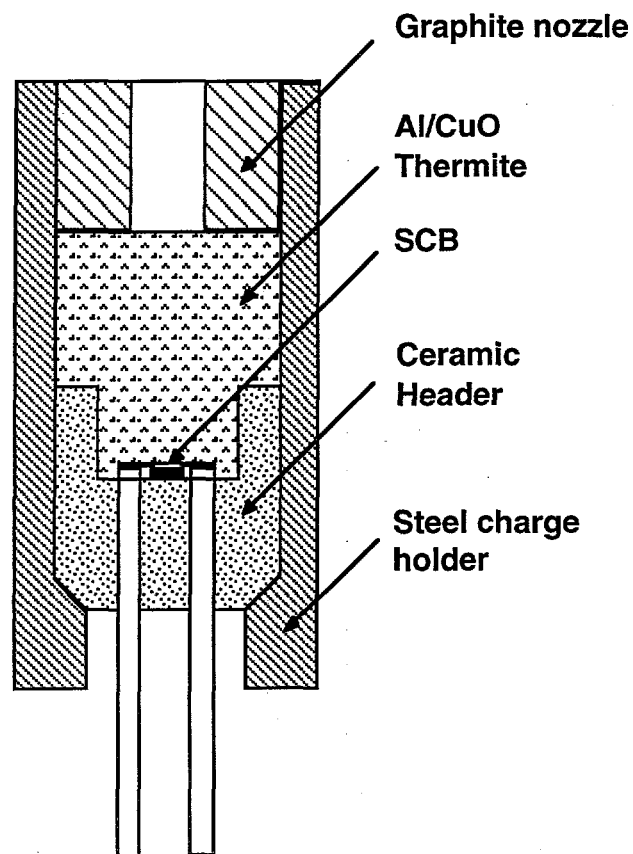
Thermite torch consisting of a ceramic header mounted in a steel charge holder. The thermite is pressed to a density of  $2.5 \text{ g/cm}^3$ ; the graphite plug with a 1.58 mm (0.062") nozzle is inserted into the charge holder onto the output charge.
